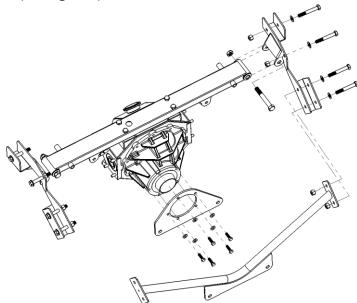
Exploded view of the housing and crossmember, 3rd member, pinion plate and pinion support.
